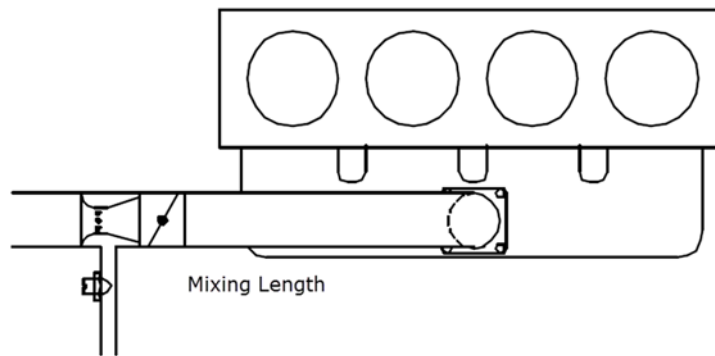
Mixer and Throttle Valve Installation before the Inlet Manifold
